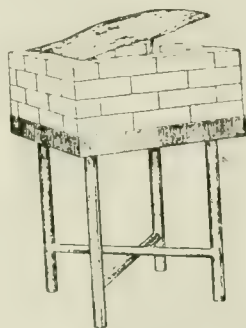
Fire brick preheating furnace mounted on small welding table.
